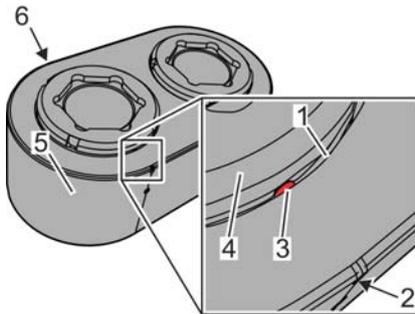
Releasing the hexagon socket set screws of the rotating slide ring sealing parts
